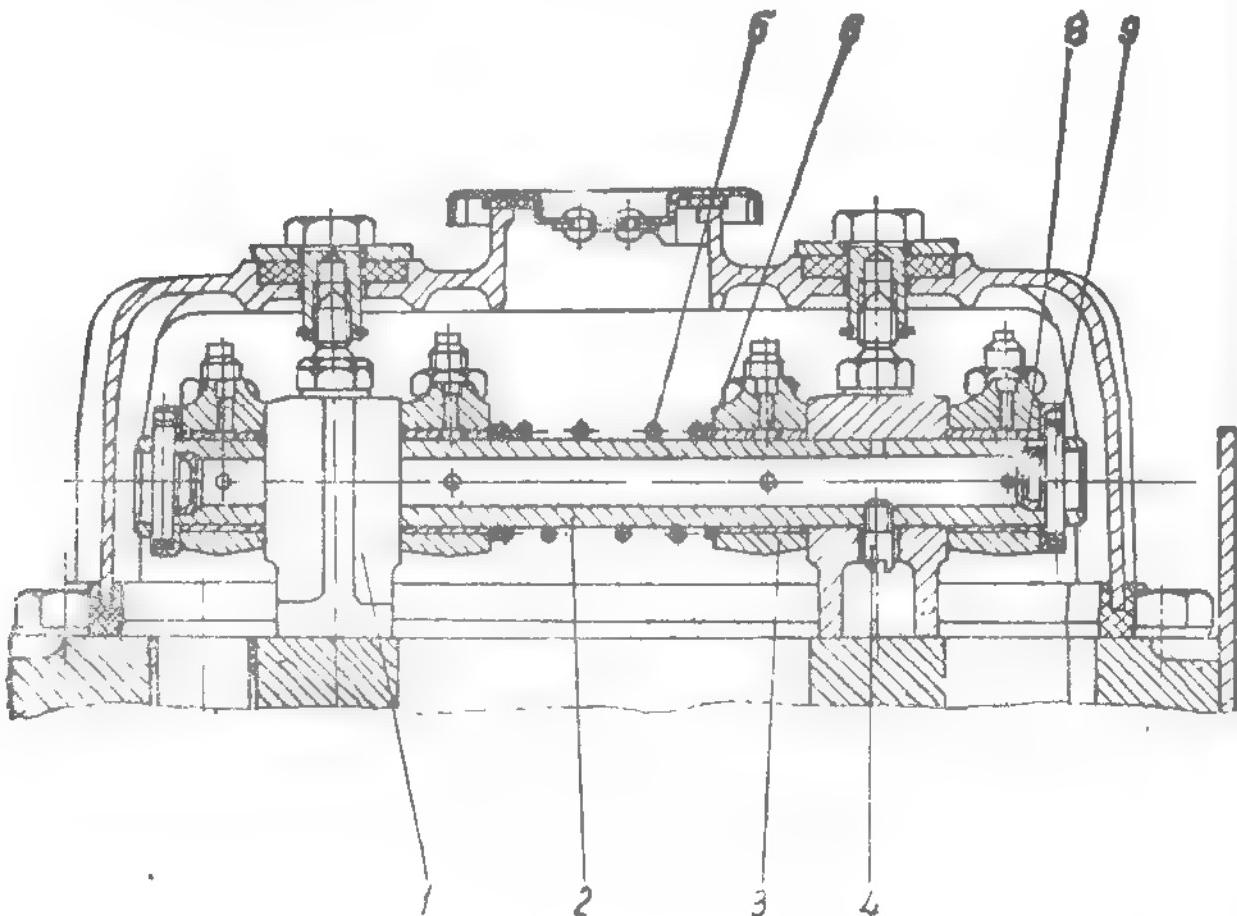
ASSEMBLED ROCKER ARM SHAFT OF D 127
